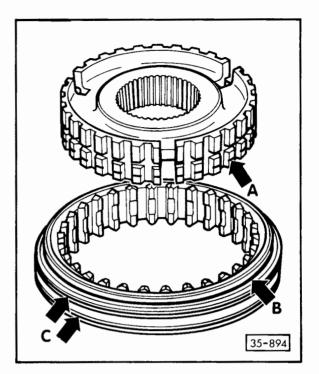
Assembling sleeve and synchronizer hub for 3rd and 4th gears
